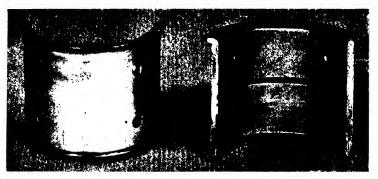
Nickel-cadmium Alloy Bearing in Good Condition after Severe Breakdown Test
